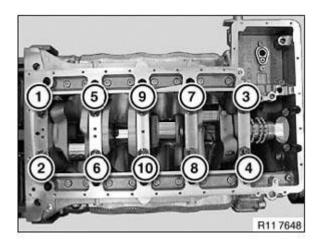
Identifying Fit Bolts (M9) Tightening Sequence Courtesy of BMW OF NORTH AMERICA, INC.
